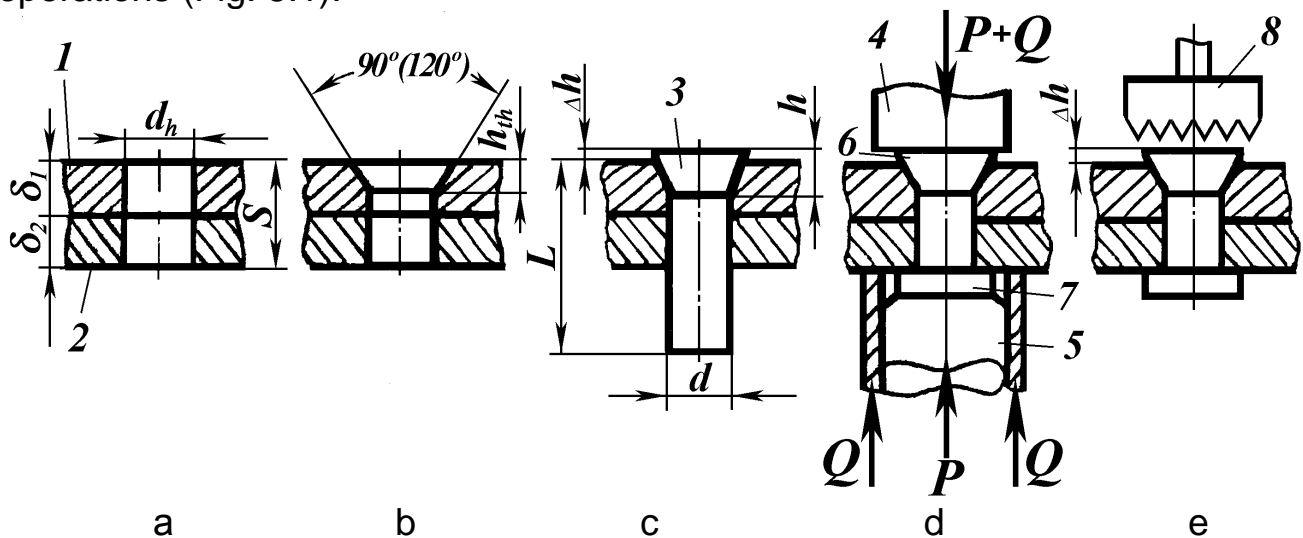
Operations of riveting process: a – making of the hole; b – countersinking of the hole; c – placing of rivet; d – riveting (in the clenched stack); e – milling of the head of flush rivets (1, 2 – parts to be joined; 3 – rivet; 4 – hammer; 5 – bucking bar; 6 – manufactured rivet head; 7 – upset (shop) rivet head; 8 – miller)
